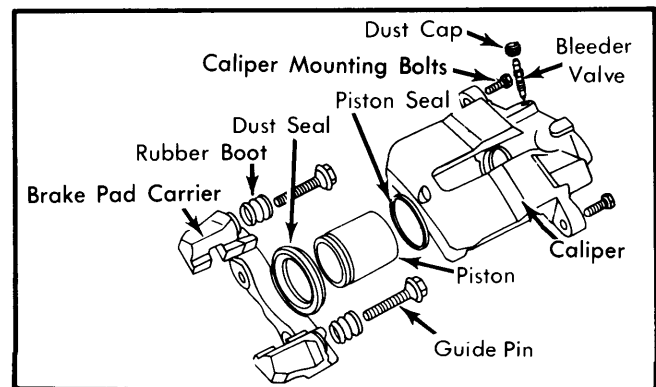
Exploded View of Audi 4000 and Turbo Front Disc Brake Caliper Assembly
